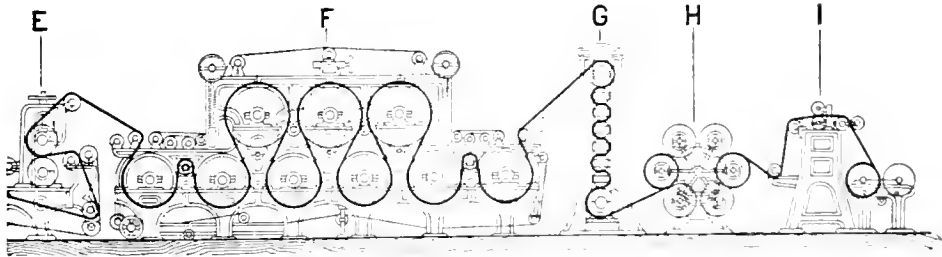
FOURDRINIER MACHINE IN SECTION.
